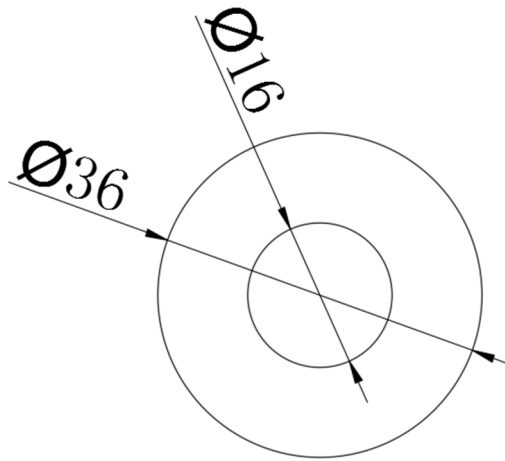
Rotor dimensions for 6/10 Vernier machine.
